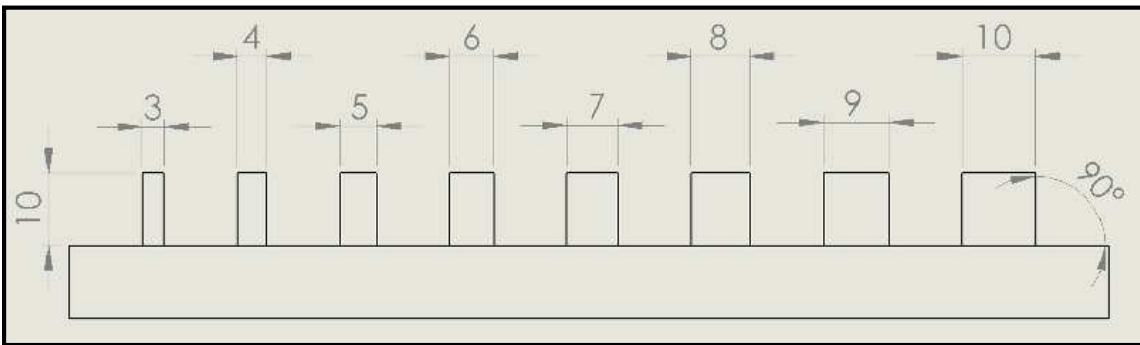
Test geometry 1: 2-D CAD drawing – with dimensions
